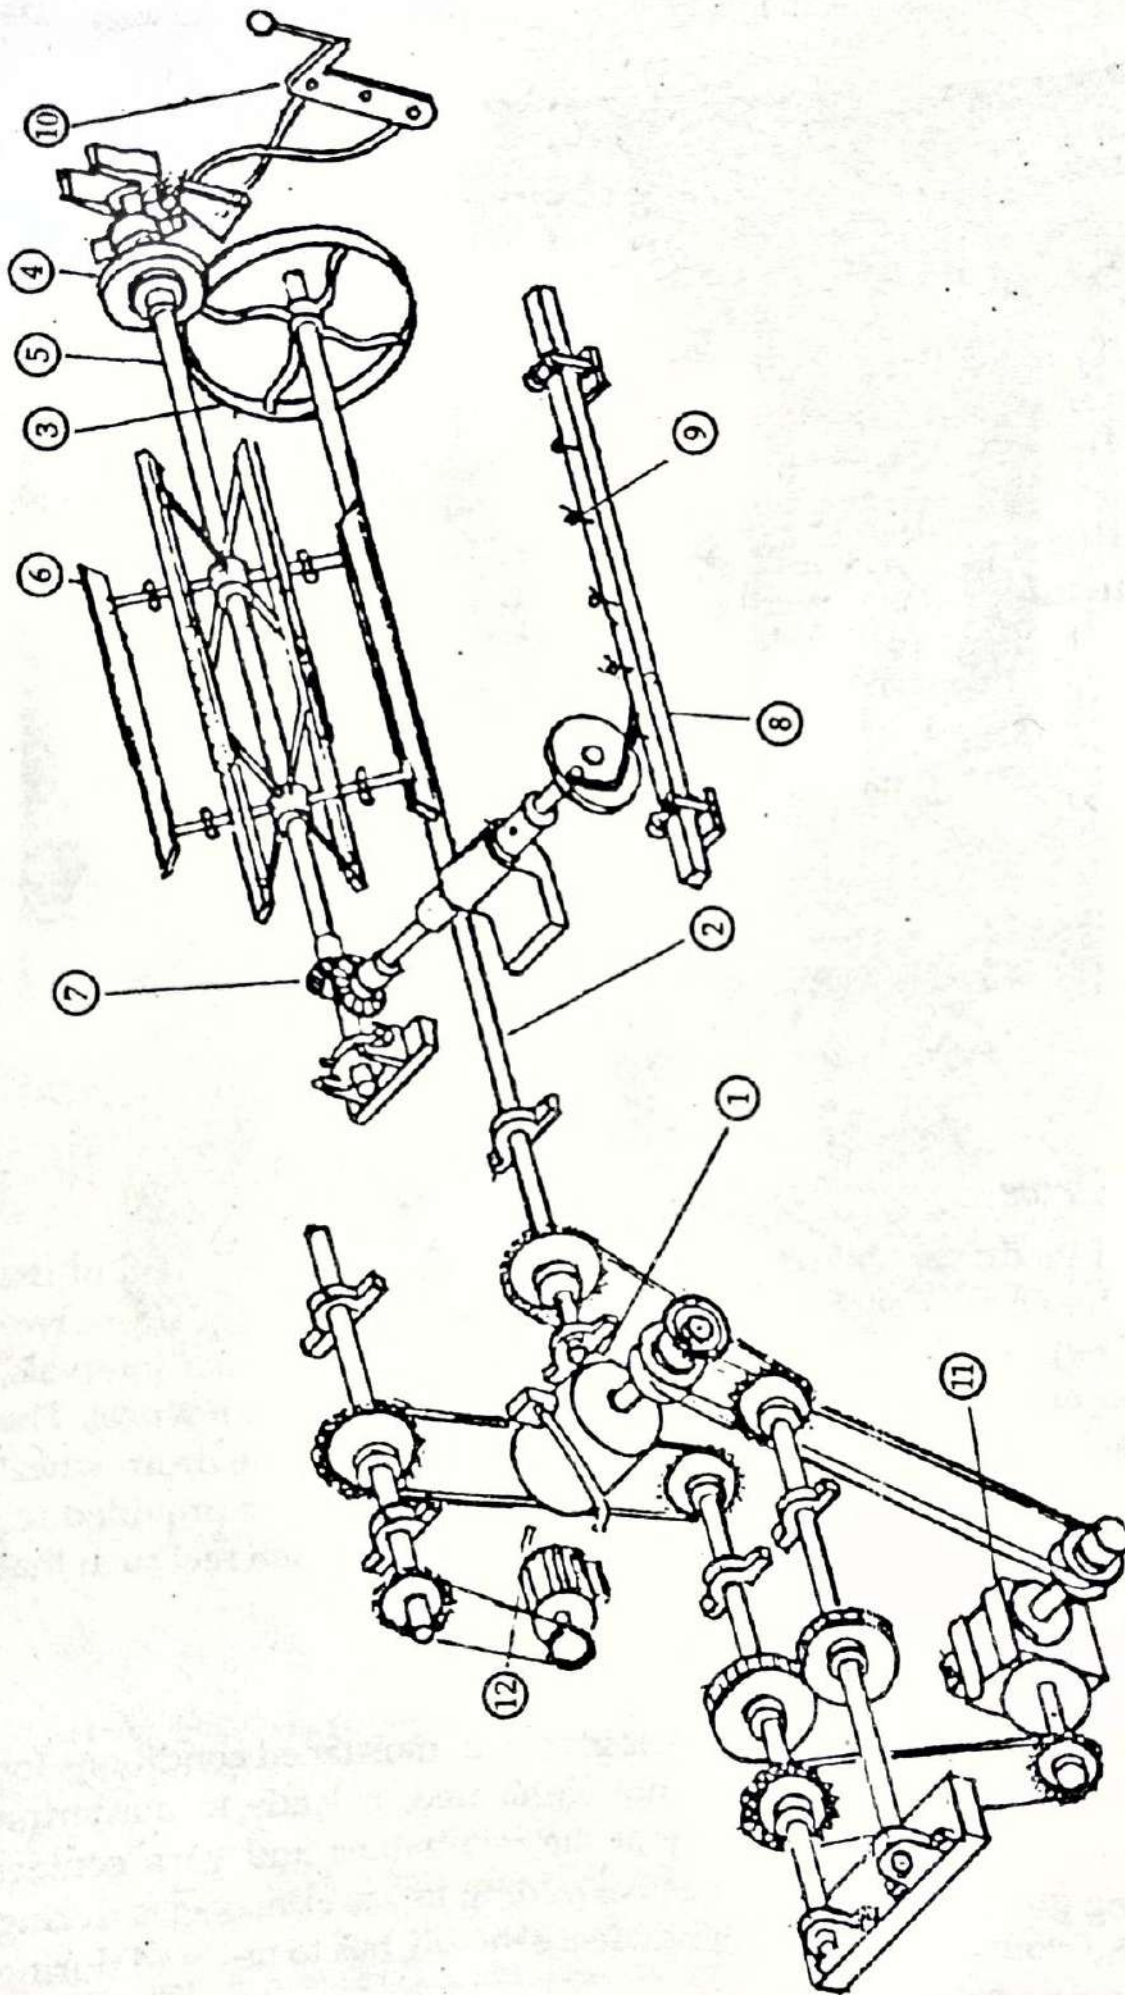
Improved Re-reeling machine - Gear diagram
